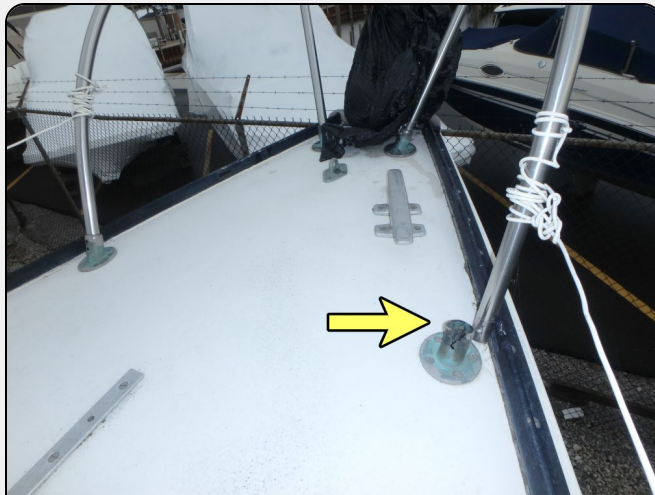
Stanchion base is cracked allowing the stanchion support to come out
